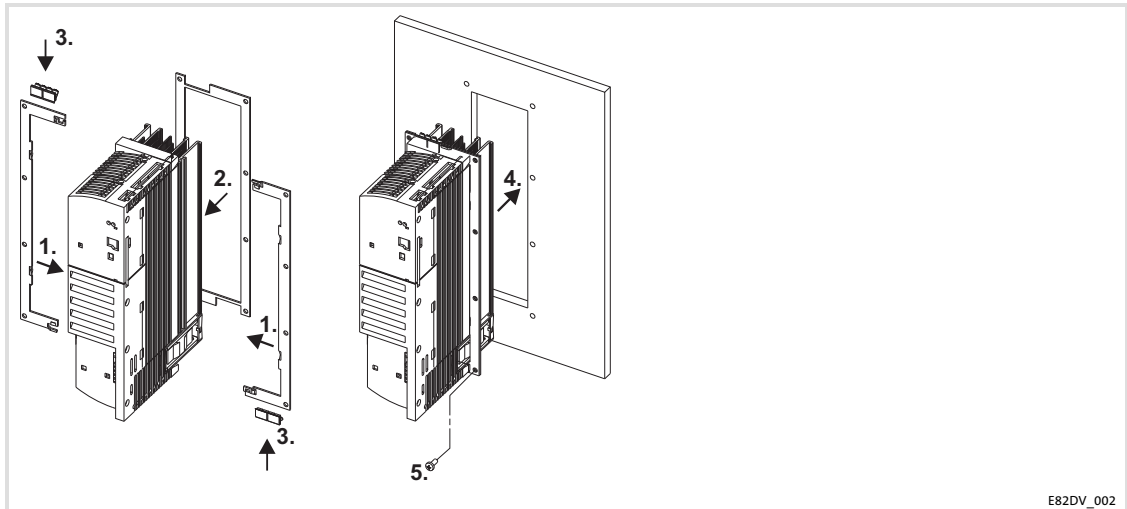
Thermally separated mounting 1.5 ... 2.2 kW
